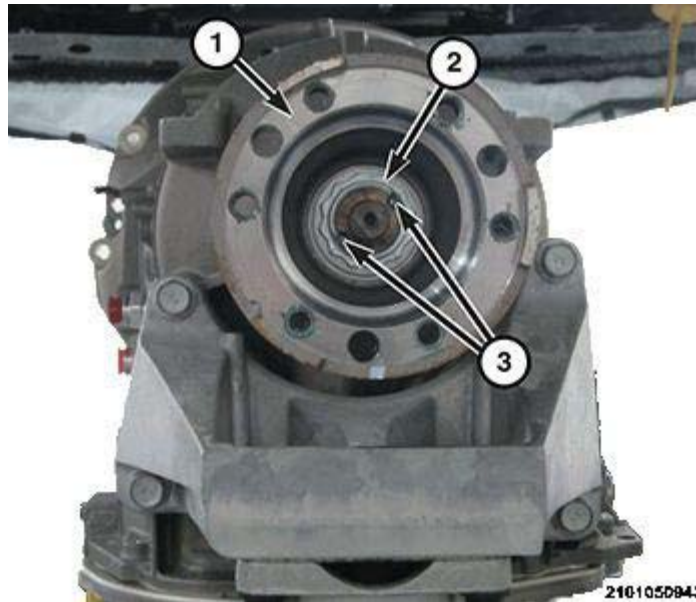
Drive Shaft Flange, Nut & Staking Area
